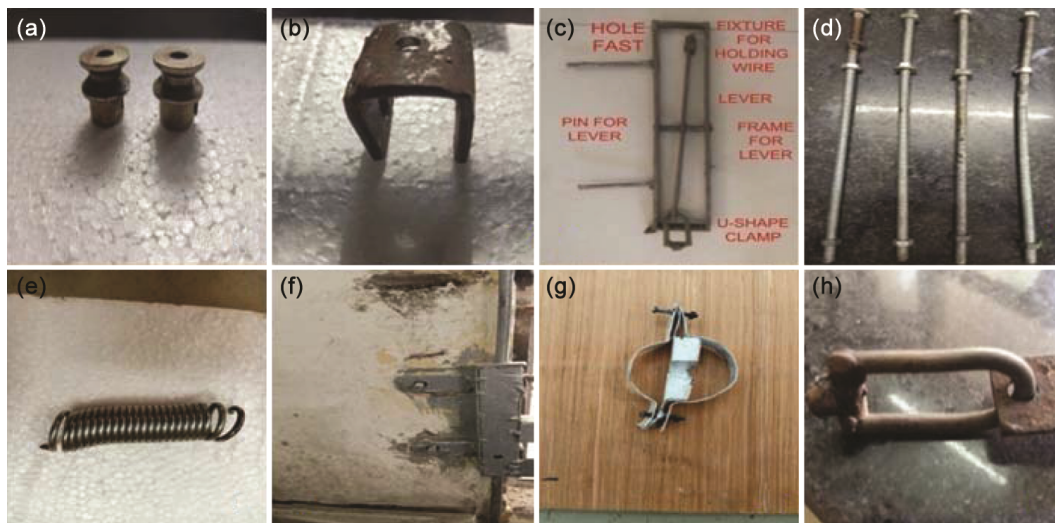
a) Pulleys, b) Pulleys holder, c) Lever and lever frame and hole fast, d) Studs, e) Helical spring, f) Rectangular sealed casing for spring, g) Attachment for handle tap, and h) U-Shape Clamp welded with mild steel bar.
